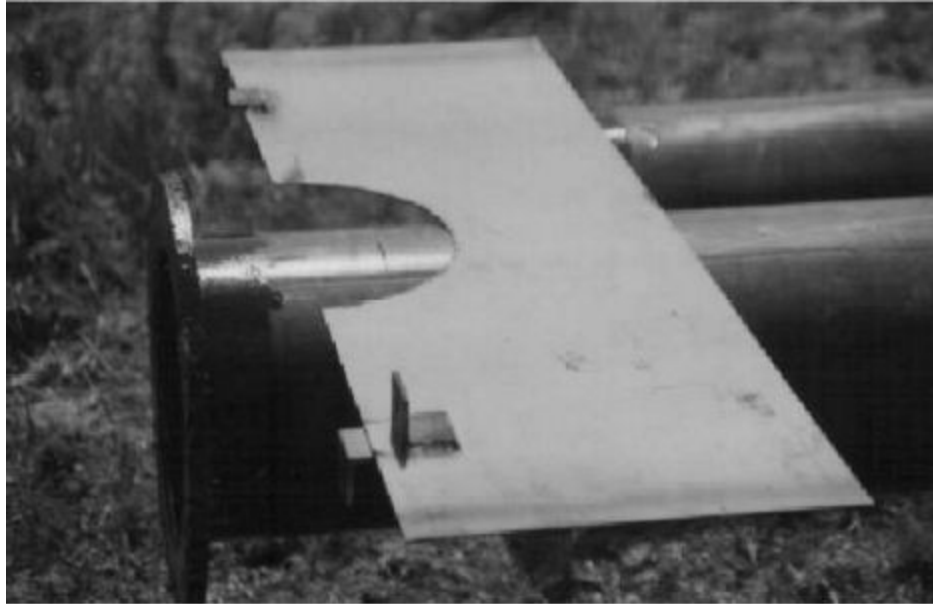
After the flanges are welded to the pipe the weld is painted to minimise rust damage.
